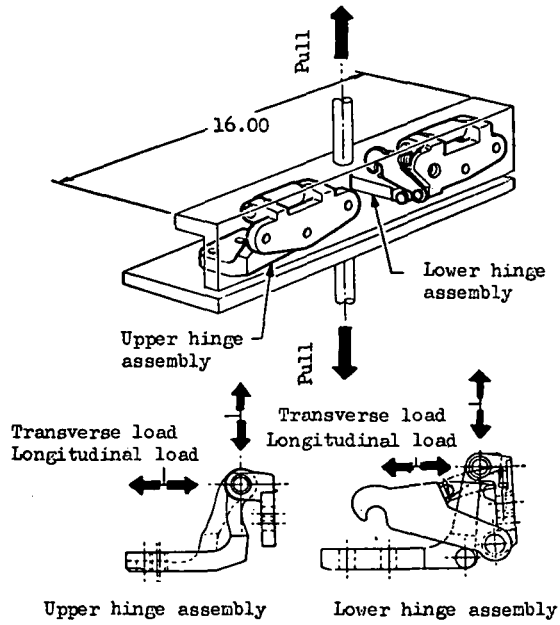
DOOR LATCH—TEST EQUIPMENT UNDER STATIC LOAD (LONGITUDINAL LOAD)
